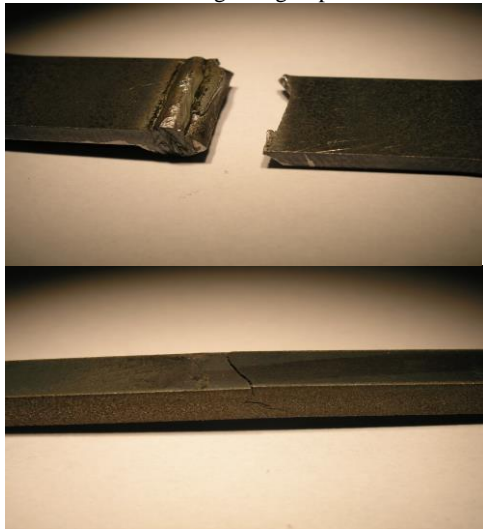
Photographs of fatigue cracked constructional steel samples: a solid sample and a welded sample [2]
